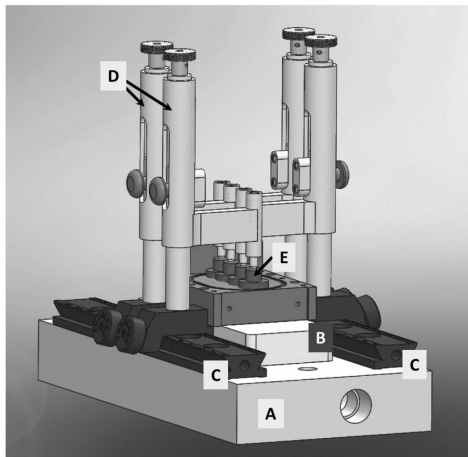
Illustration of the multi-press assembly device. Baseplate (A), Vacuum Block (B), Guiderails (C), Clamp Assemblies (D), and plunger swivel feet (E).
